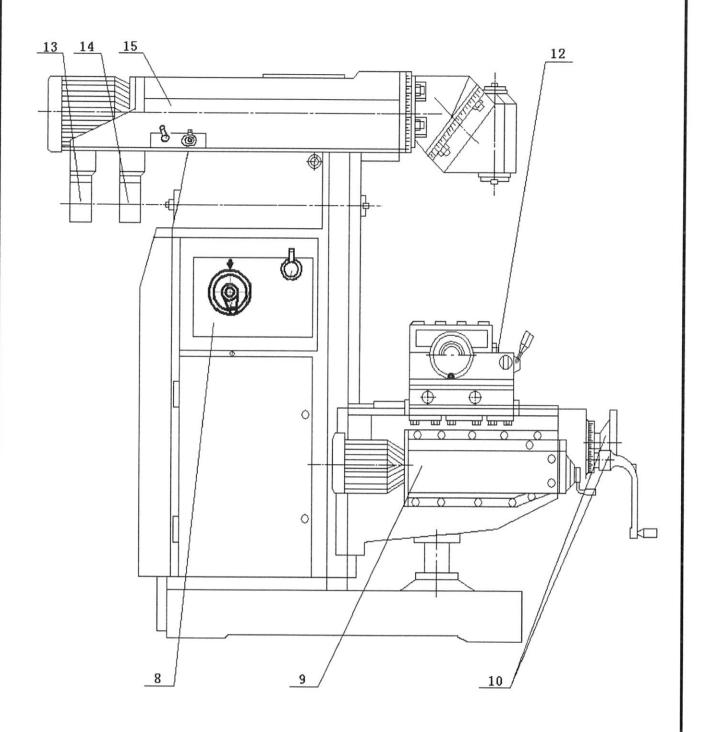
Left view of lubrication position of Universal rotary-head milling machine
